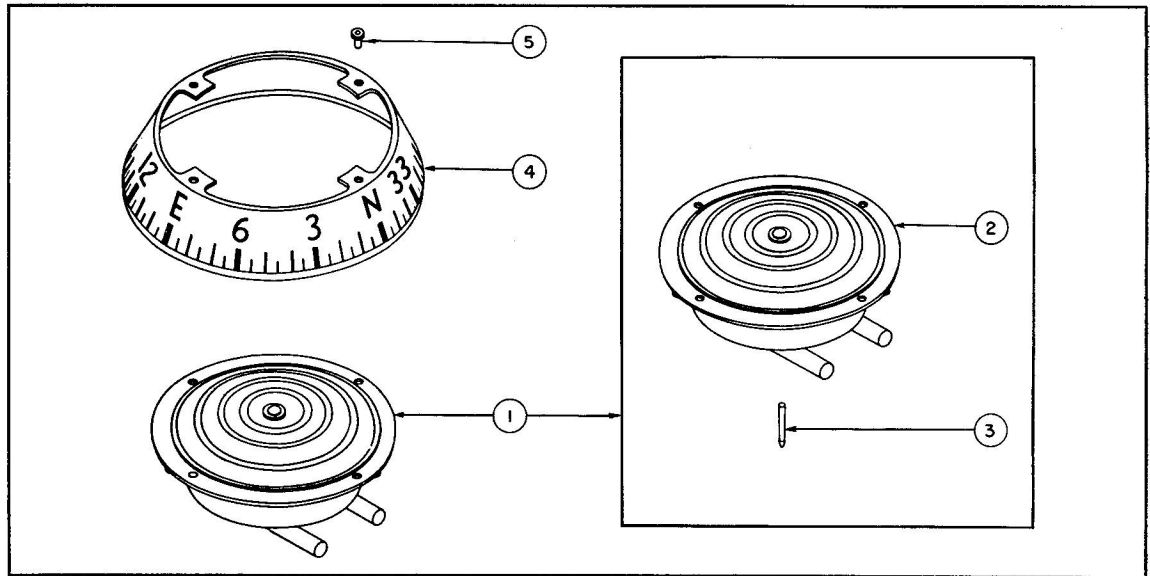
Exploded View - Compass - Card Assembly - Type B-16
